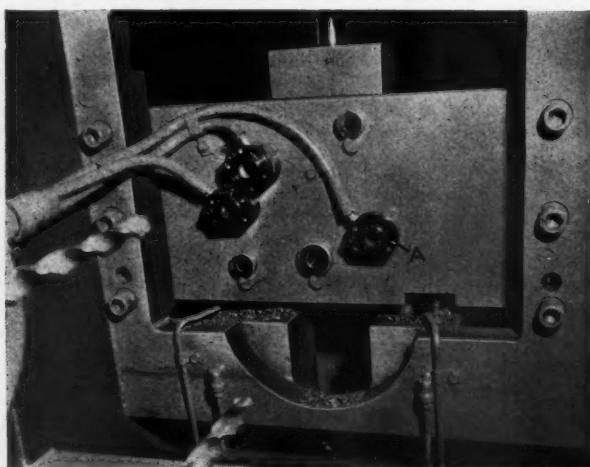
Application of three Detect-A-Tool sensing heads on the drill bush plate of a transfer machine
